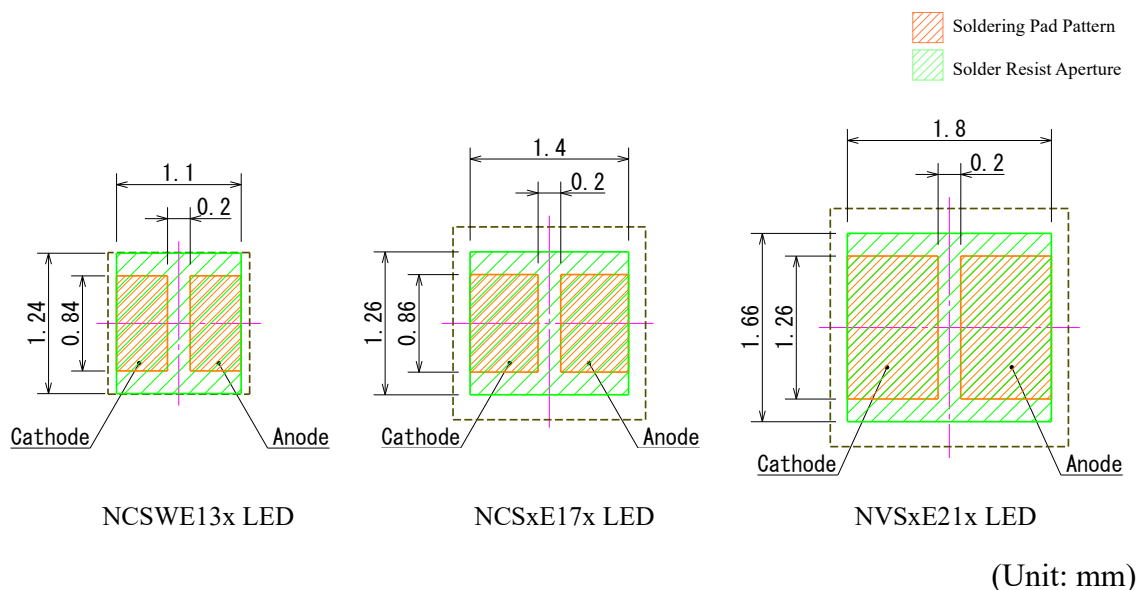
Recommended Soldering Pad Pattern for the NSMD Structure
